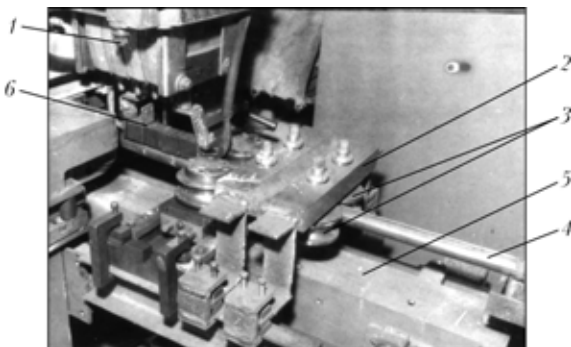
Laboratory equipment for carrying out experiments: 1 --- high-frequency transformer; 2 --- roll stand; 3 --- two pairs of rolls; 4 --- pipe being welded; 5 --- bed; 6 --- inductor
